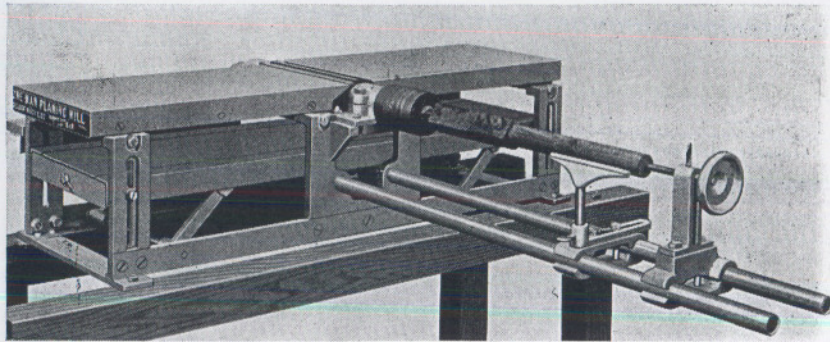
SHOWING LATHE ATTACHMENT, WITH A SQUARE BEING TURNED.
